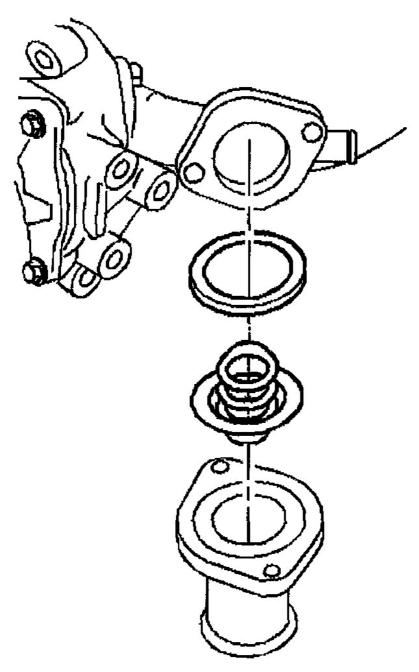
Thermostat Outlet Courtesy of GENERAL MOTORS CORP.
